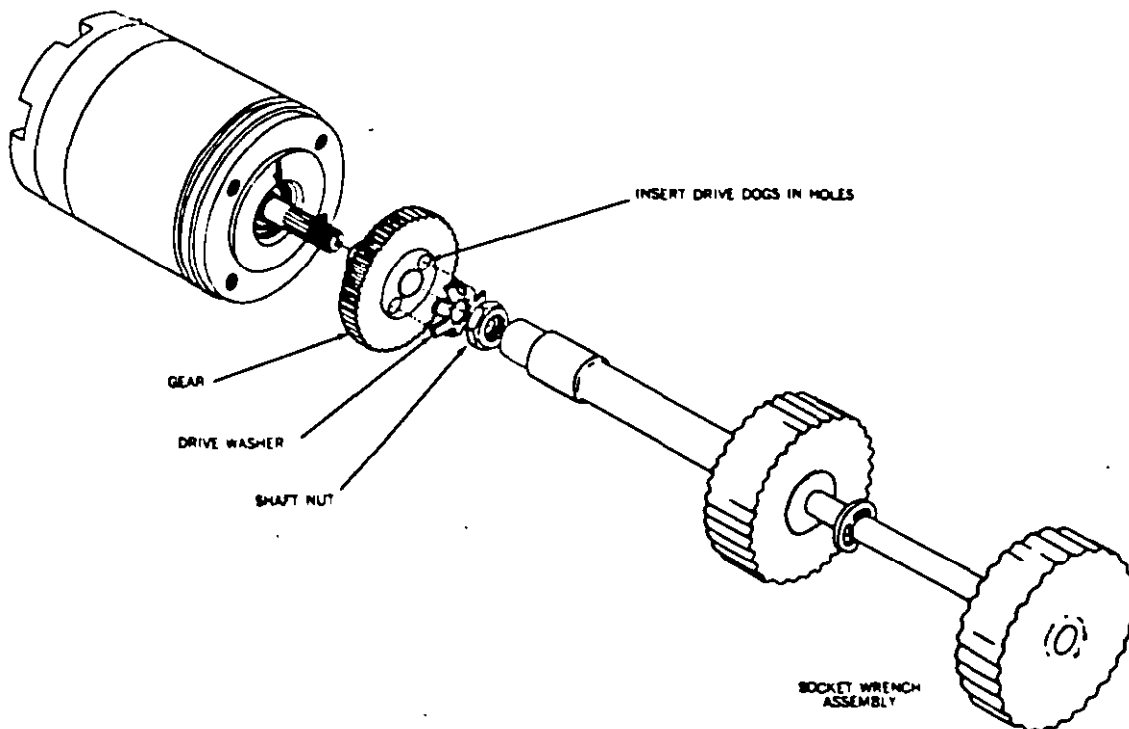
Mounting a gear on a standard synchro (exploded view).
